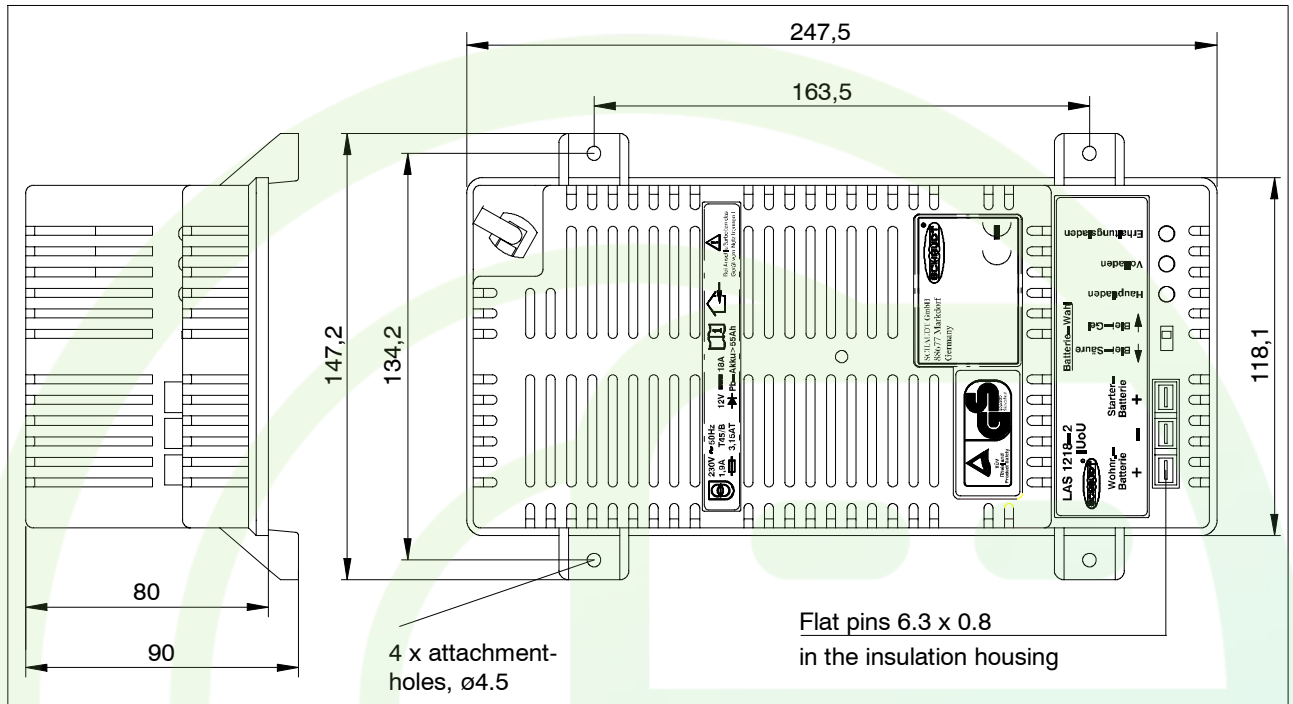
Dimension diagram of LAS 1218-2 battery charger (dimensions in mm)
